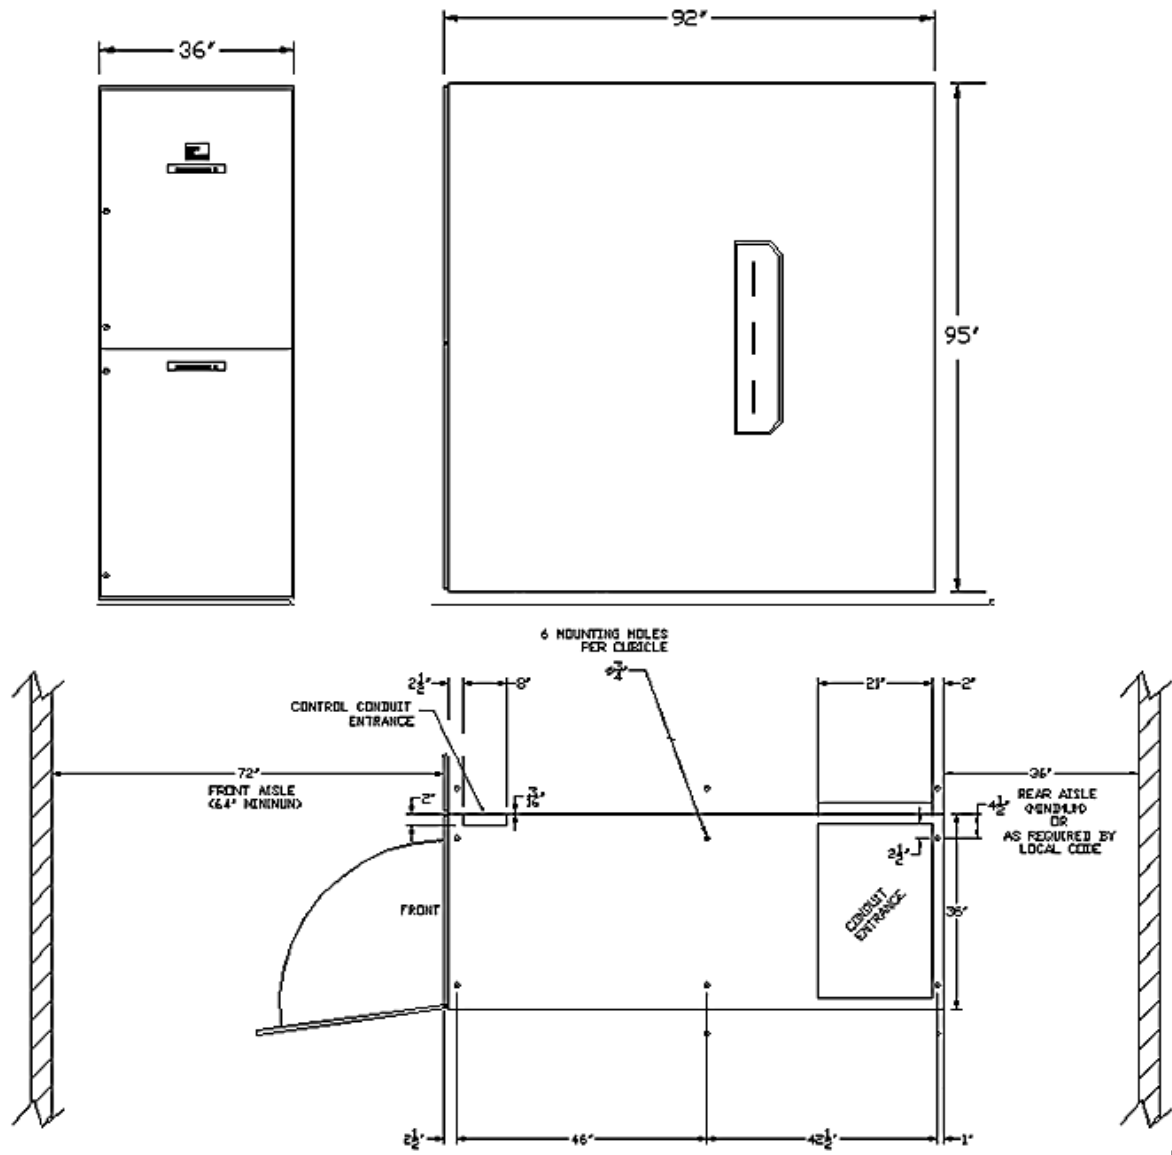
Metal-Clad Switchgear Front, Side, & Top Views – Dimensions Typical of NEMA 1 Section; NEMA 3R adds several inches to the Height & Depth
